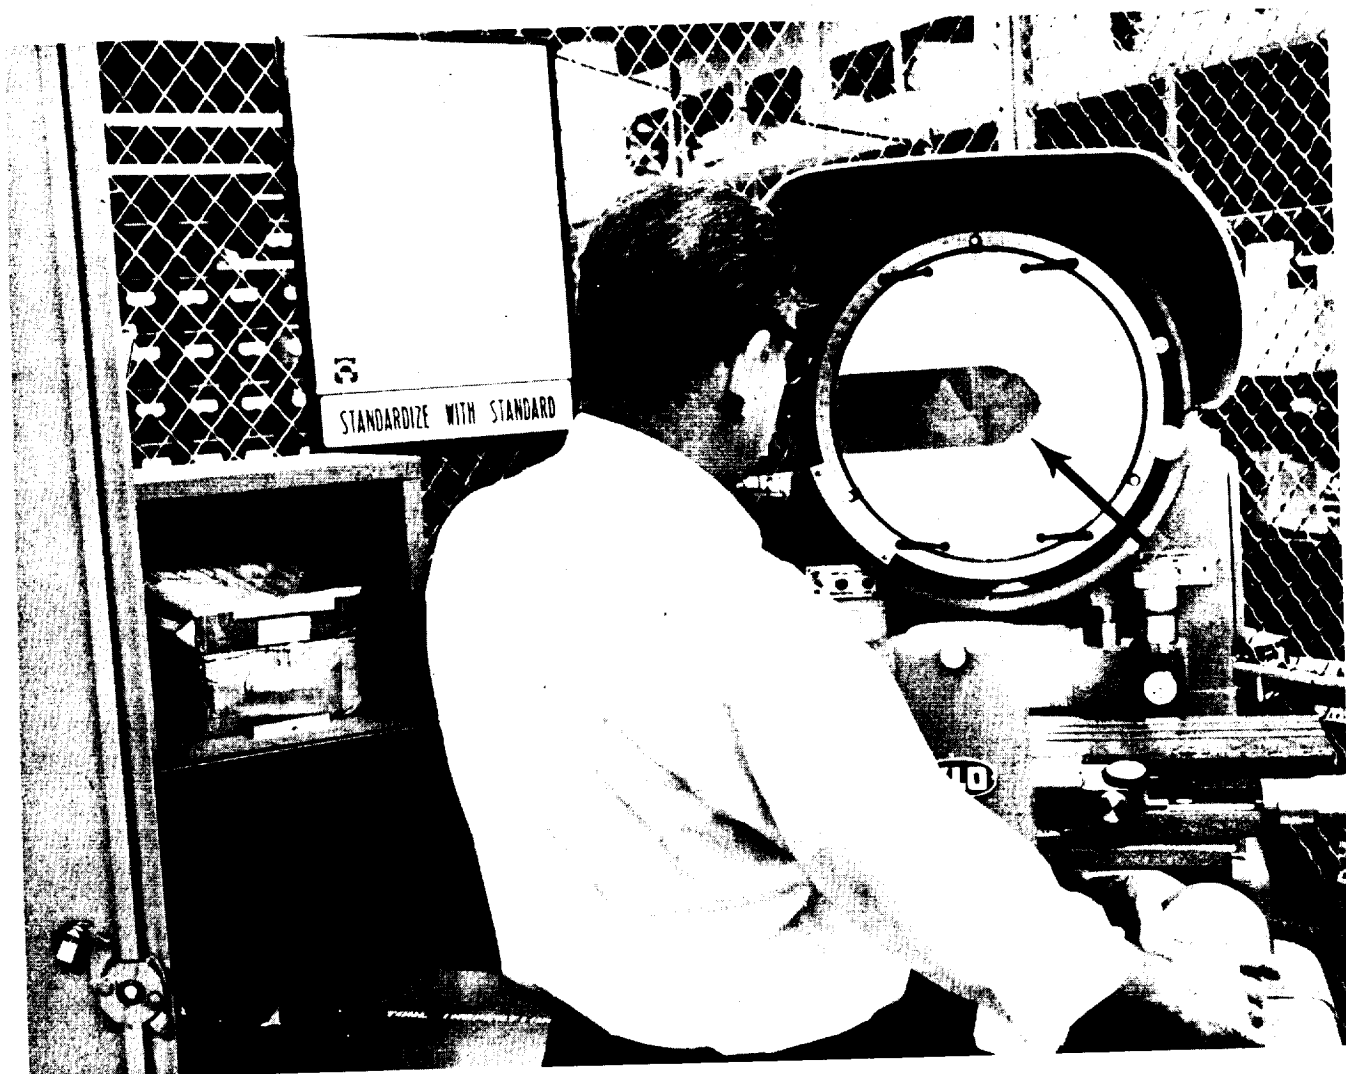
BURR-POINT DRILL INSPECTED ON A COMPARATOR.
